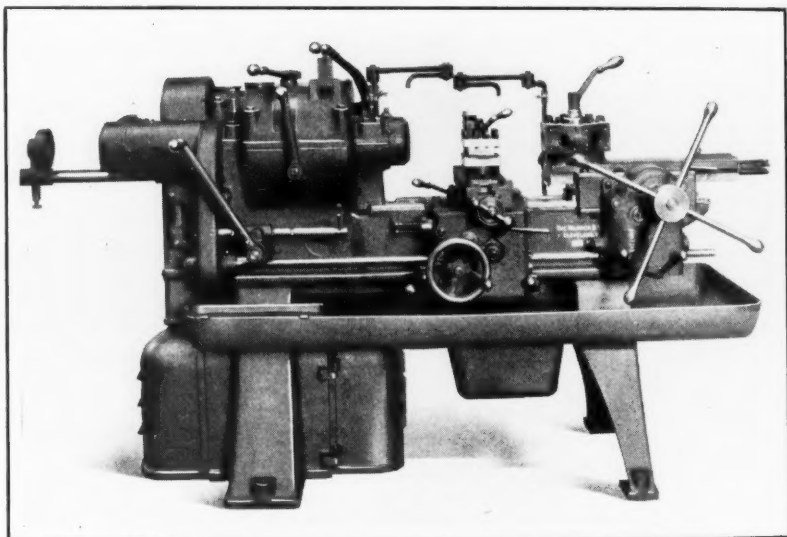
Warner & Swasey Improved Universal Turret Lathe with All-gear Head
